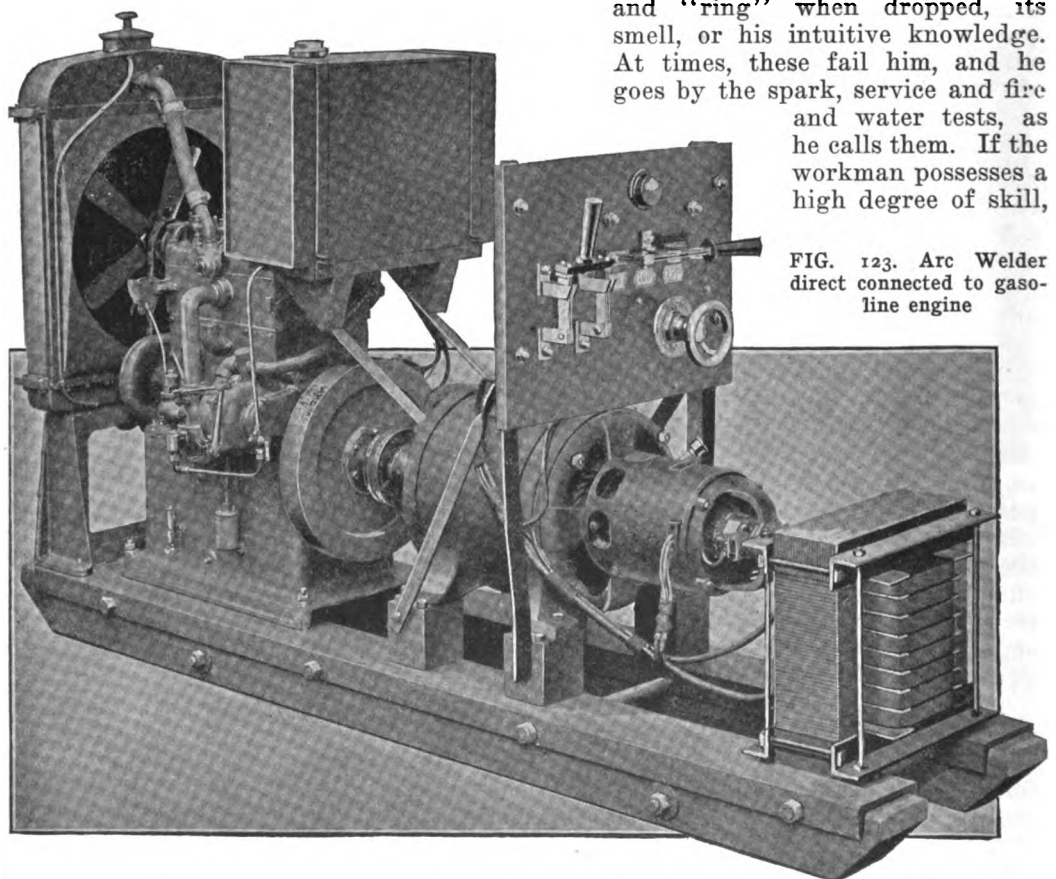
Arc Welder direct connected to gasoline engine
